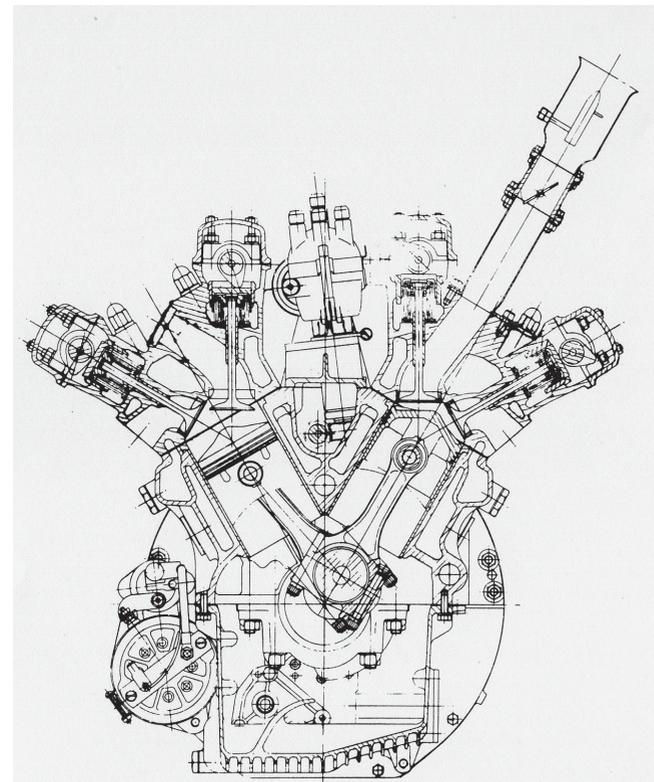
Cross-section of twin-cam V12 engine showing original inlet ports left and final ports right
